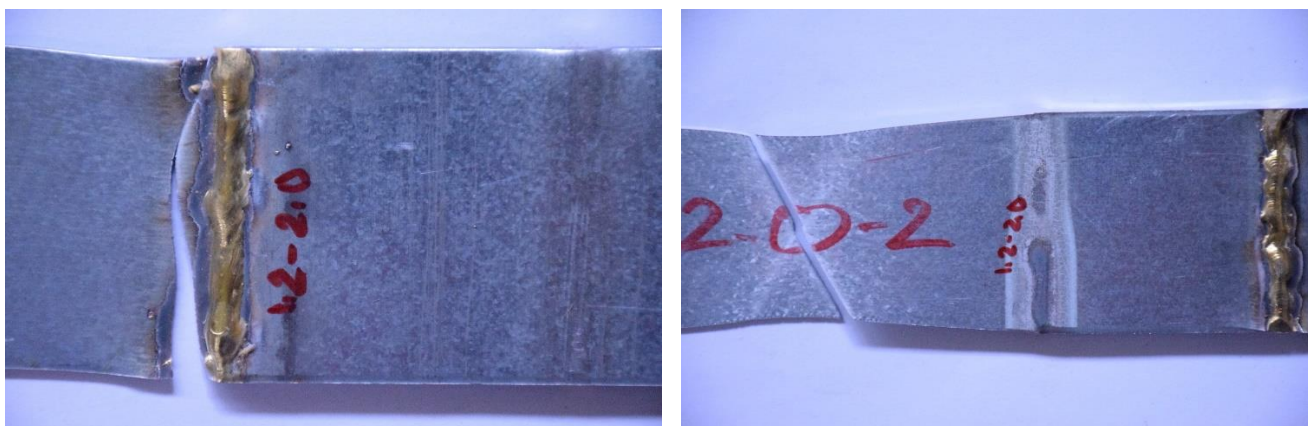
Failure modes of CMT-1.0-2.0 specimens
